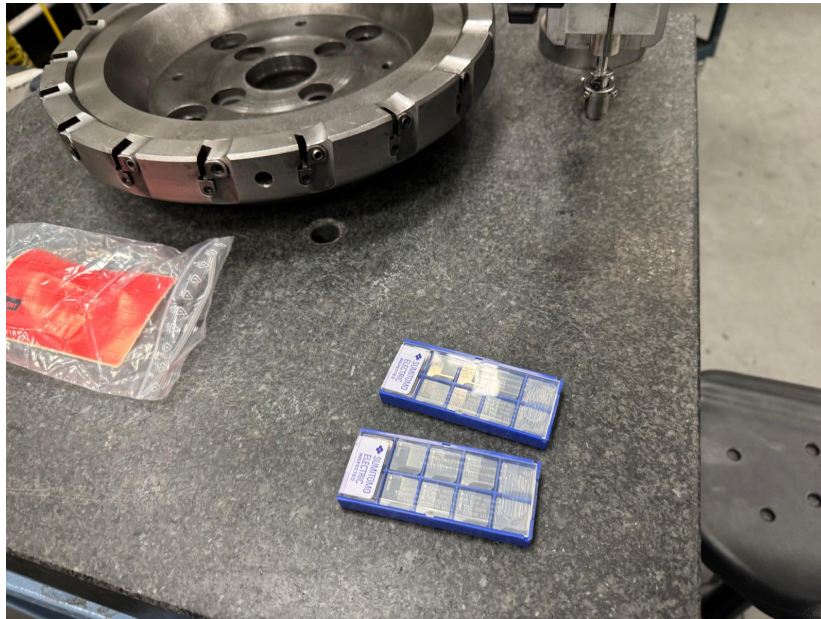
Checking and sorting carbide inserts while changing a milling tool, on the metrology surface plate.
